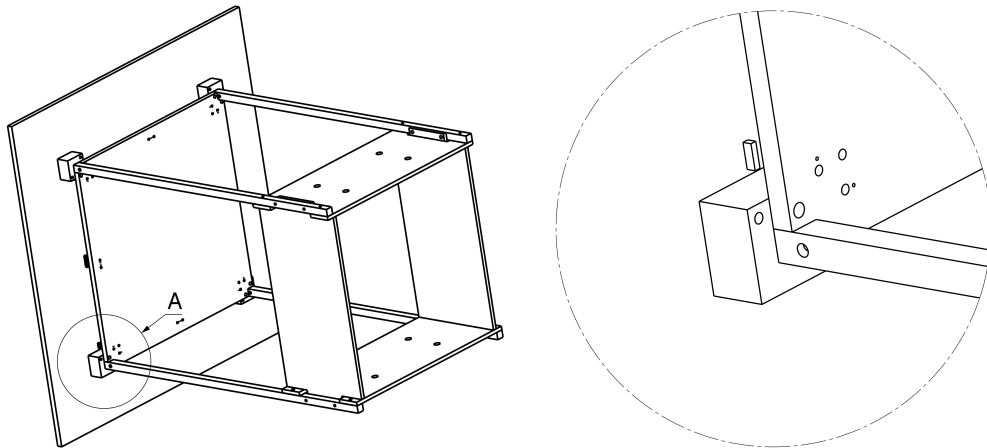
Drawing of the basic structure of the detector mounting.
